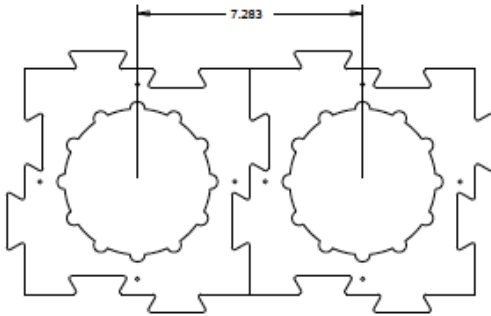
CAD drawing of the GT2012 modular expansion component mounting boards.
